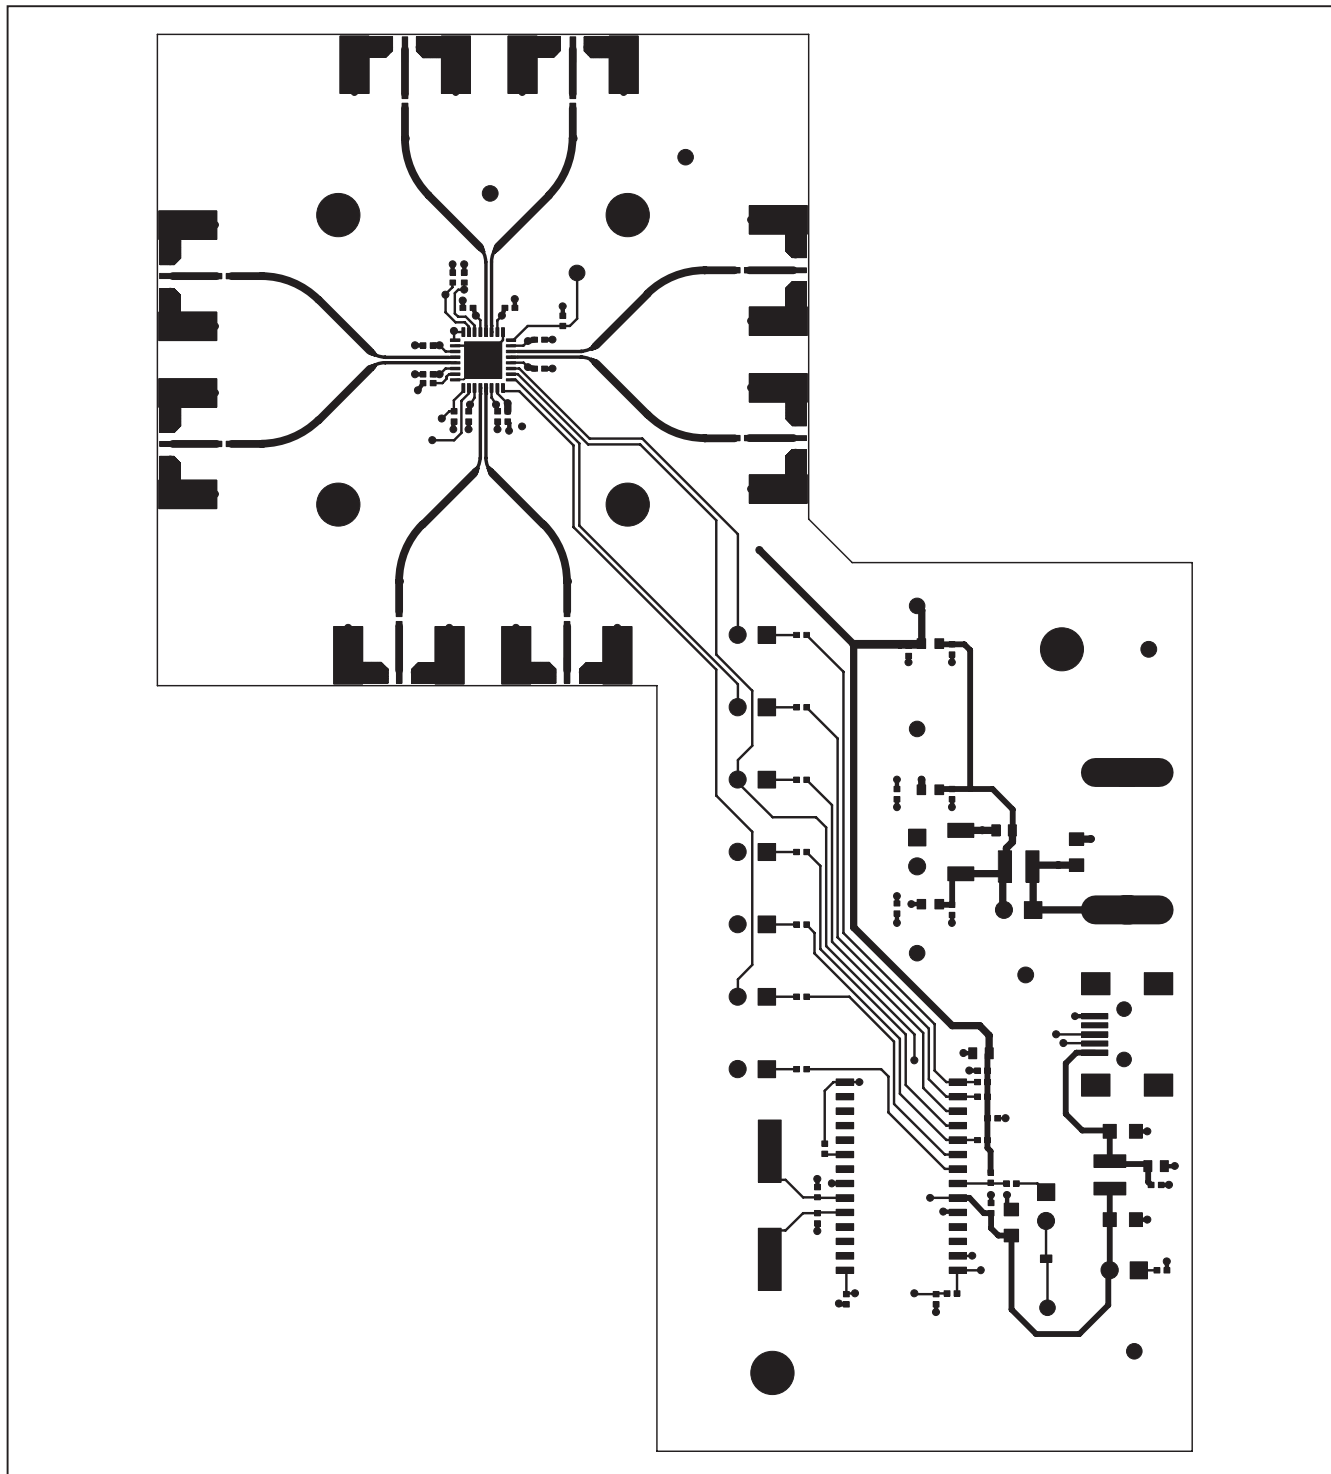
MAX3799 EV Kit PCB Layout—Component Side
